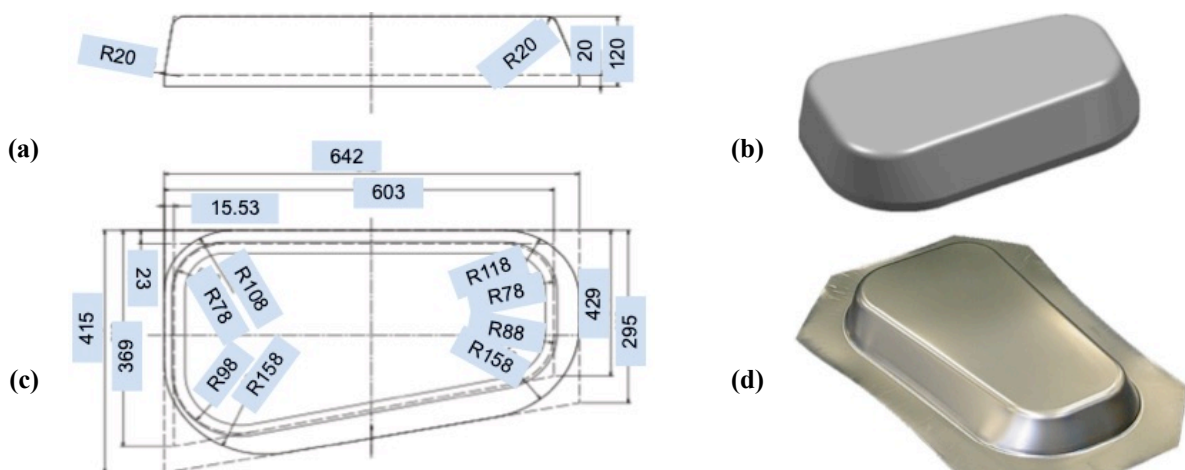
(a) Dimension of the KVG geometry (side view) in [Hae02]; (b) Punch of KVG geometry; (c) Dimension of the KVG geometry (top view) in [Hae02]; (d) A drawn part showing KVG geometry
